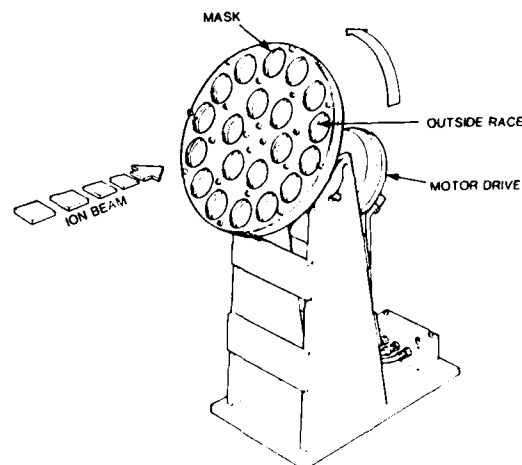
Fixture designed to ion implant outside bearing races using a rotating, cooled platter
